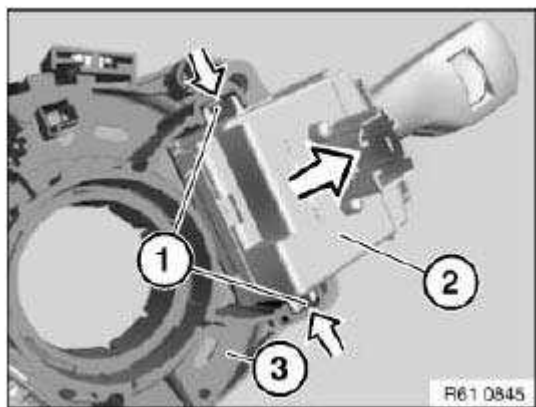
Pressing Locks And Windshield Wiper Stalk
